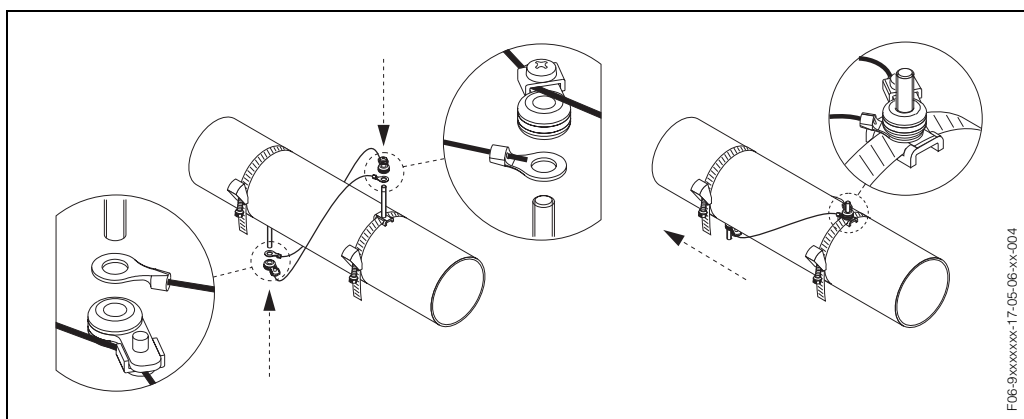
Use of the wire measuring equipment for positioning of threaded studs
